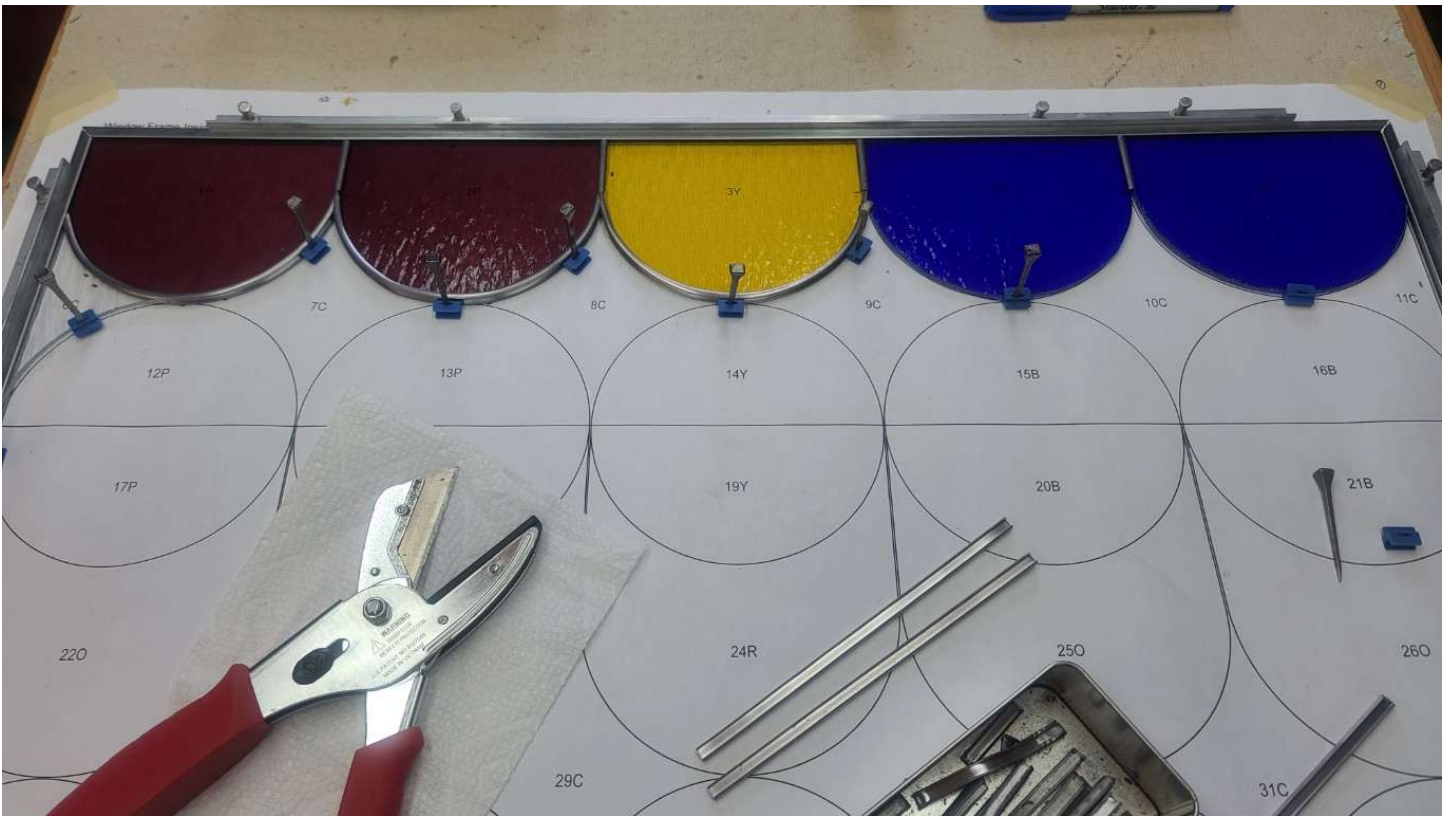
Initial Fitting and Placement of Pattern Pieces and Lead Came Channel
